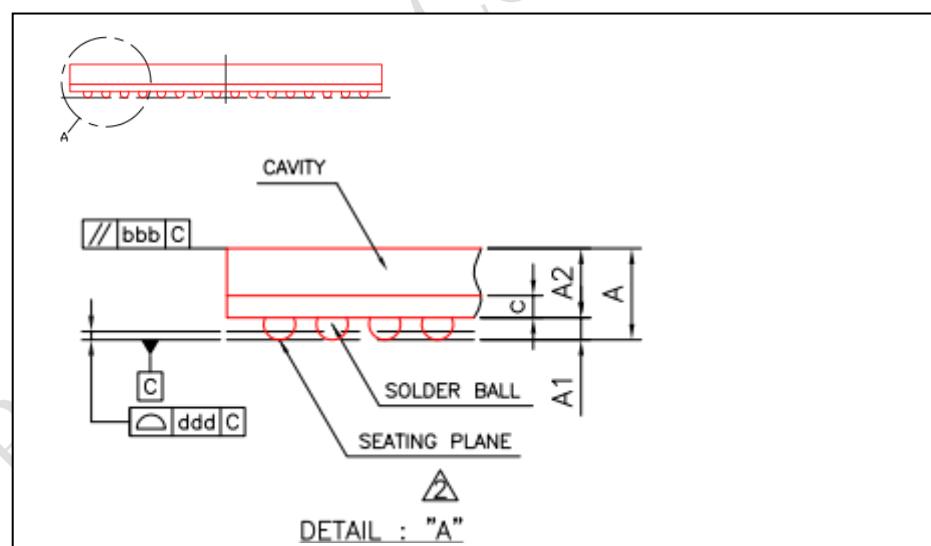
RK618 TFBGA(HF) Package Side View
